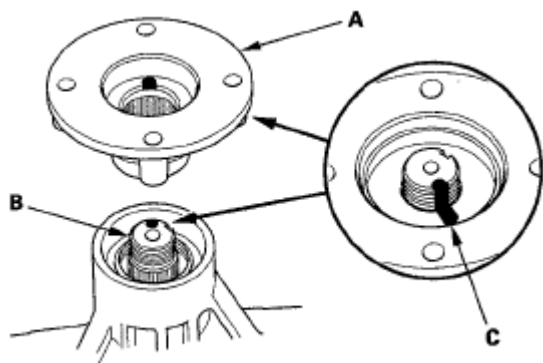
Identifying Reference Mark On Input Shaft And Companion Flange
